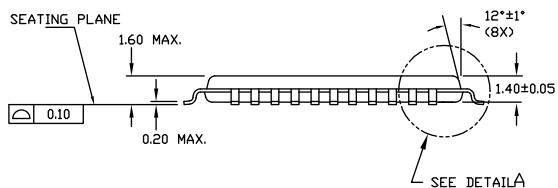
44-Pin 10 × 10 × 1.4 mm TQFP Package Outline
